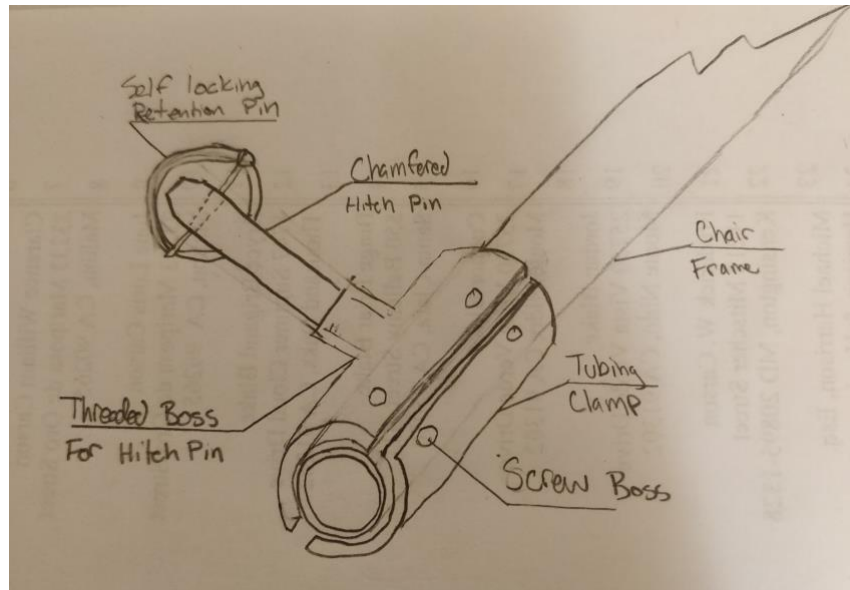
Clamp and pin lock attachment mechanism drawn by Ryan Boyce
